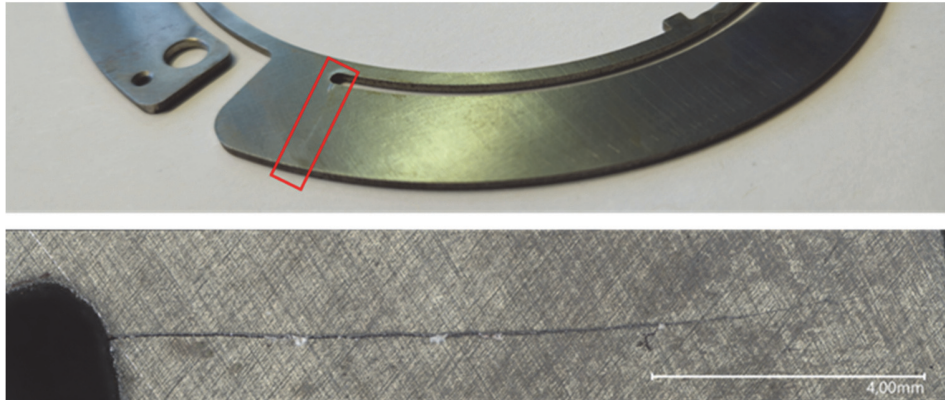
Picture of a test specimen with a cracked spring arm (top). Microscopic image of the section marked in red (bottom) with a clearly recognizable crack along the width of the spring.
